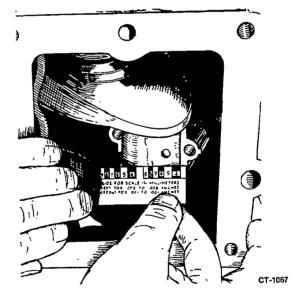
MEASURING BEARING CLEARANCE WITH PLASTI-GAGE.
